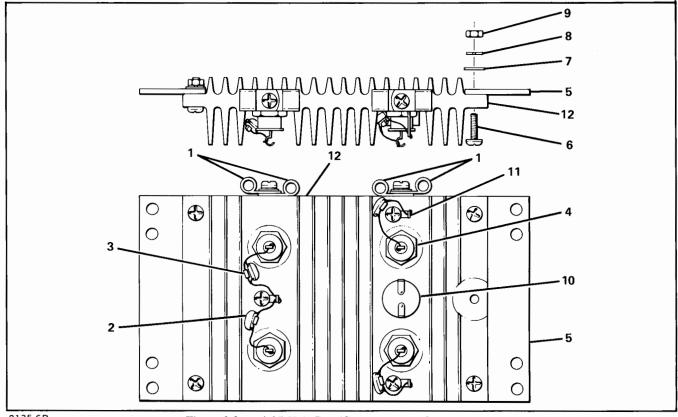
±20 Volt Regulator Assembly, Exploded View
